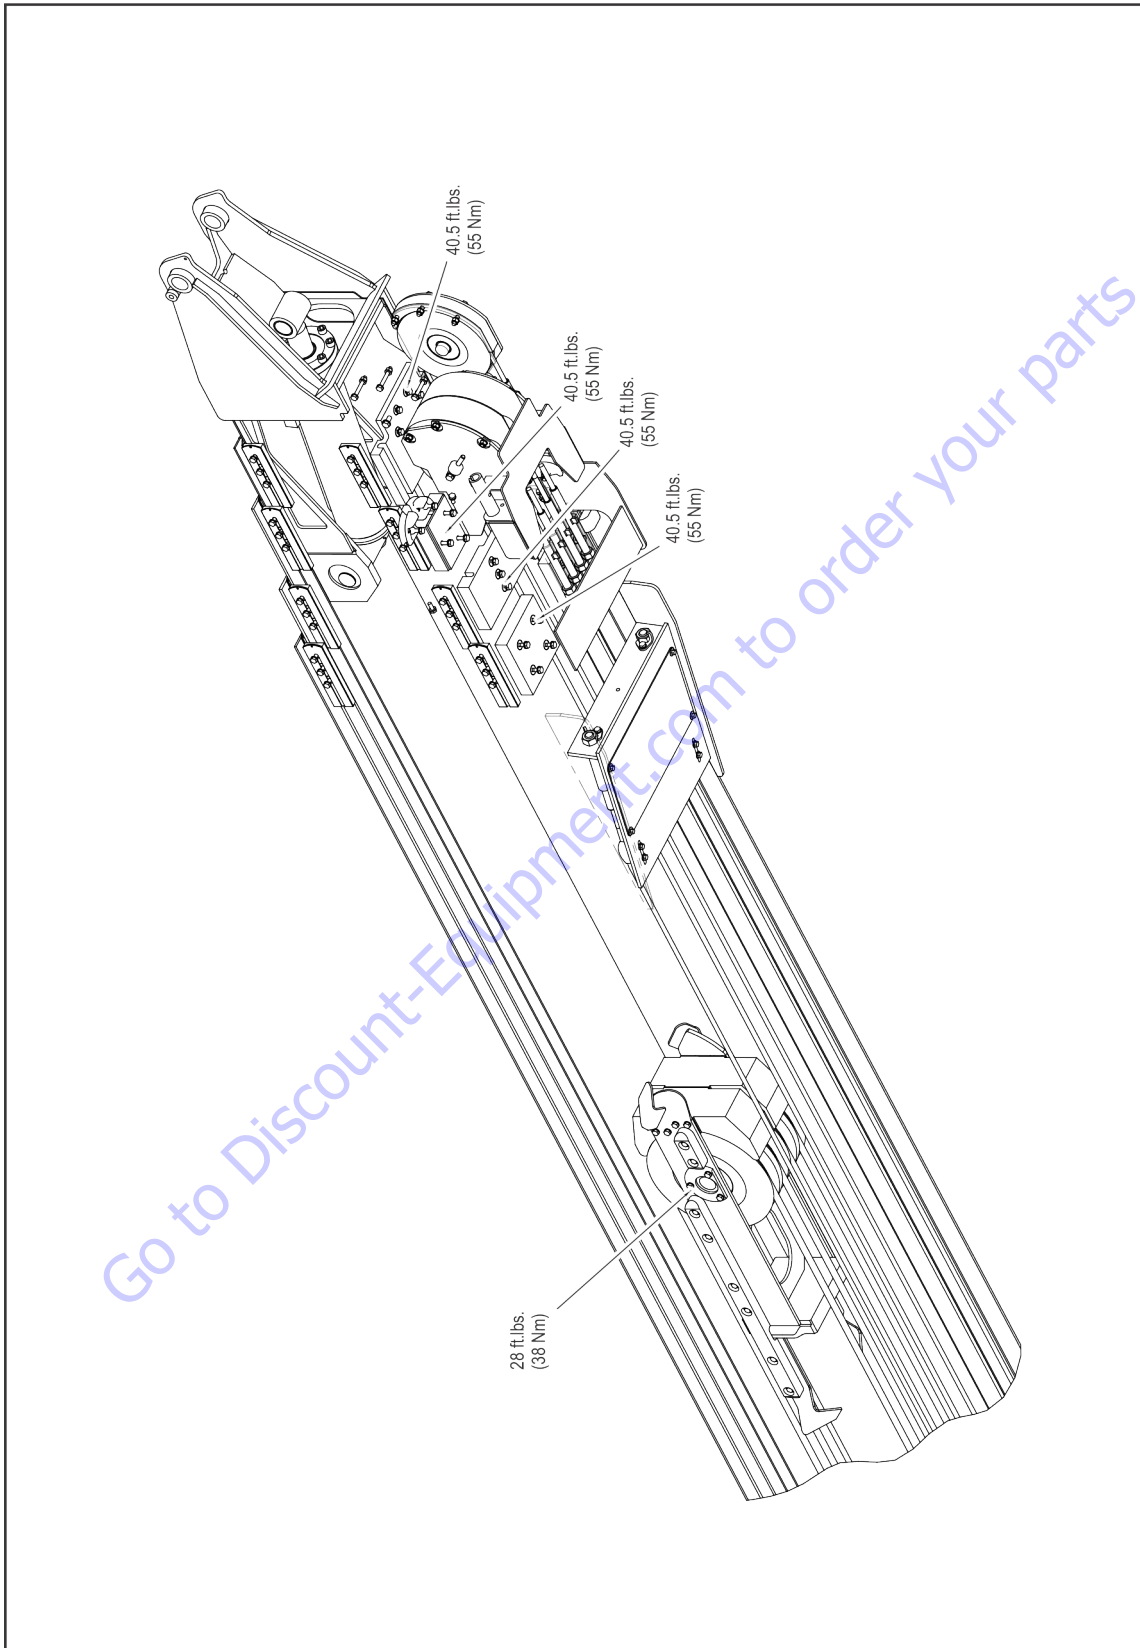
Boom Assembly Torque Values - Sheet 3 of 4
